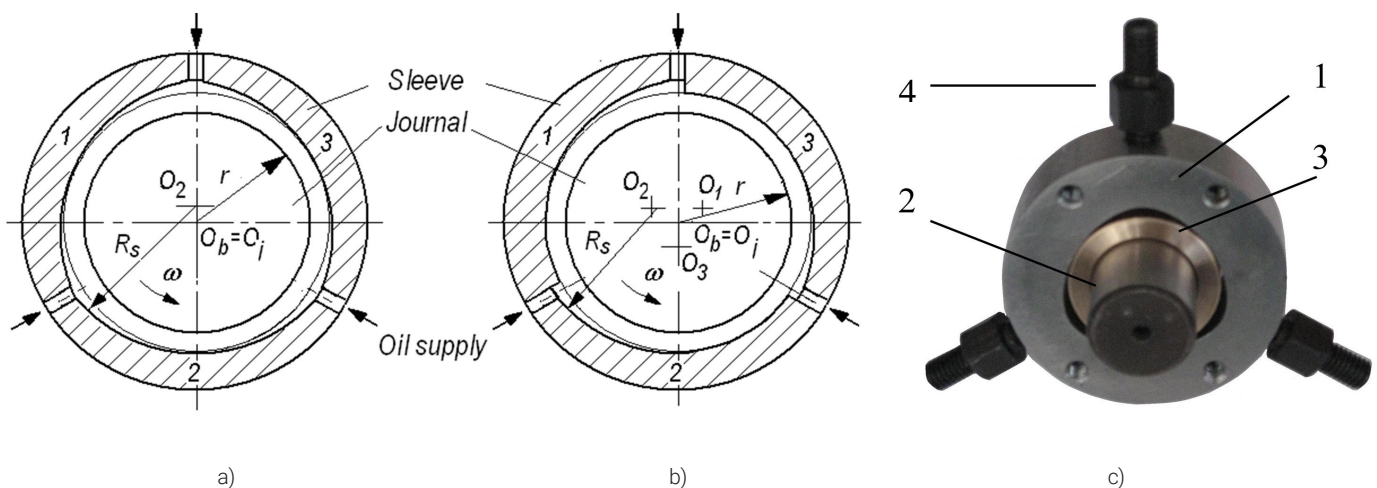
Geometry and design solution of 3-lobe journal bearings: 3M and 30F;  $O_1, O_2, O_3$  – position points of the sliding surface radius, 1, 2, 3 – sliding surfaces; c- assembly of floating ring bearing with the 3-lobe sleeve of pericycloid profile (1 – sleeve, 2 – journal, 3 – floating ring, 4 – oil supply) [3, 7]
